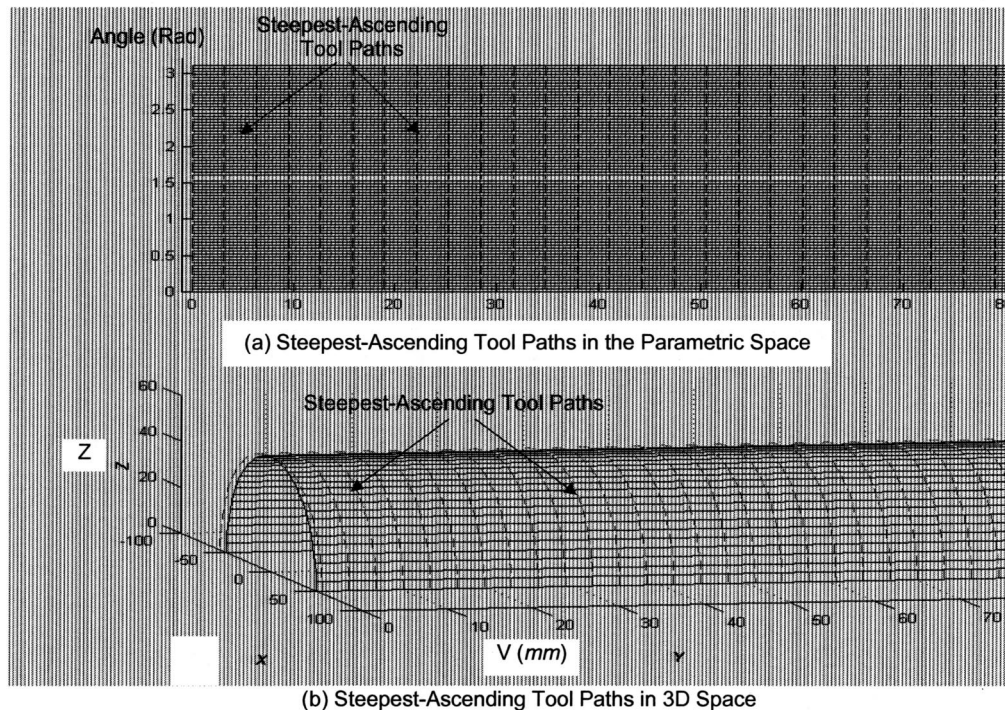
SDIC tool paths with a frame of 33 steepest-ascending tool paths
